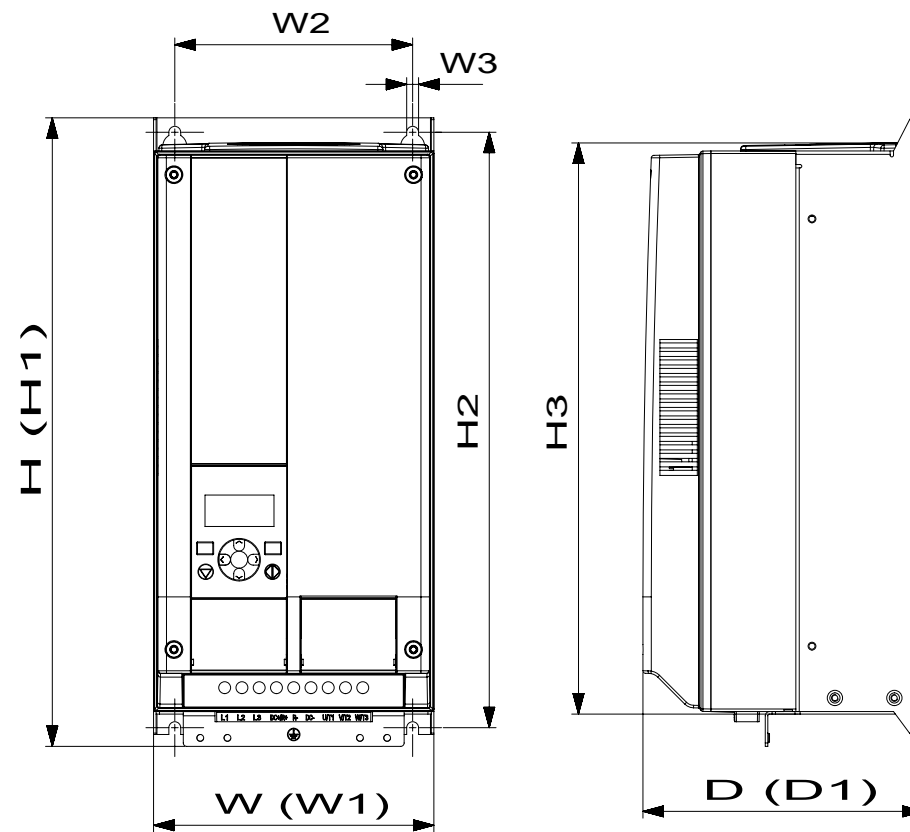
Dimensions HVAC232/402, MI4 -MI5
